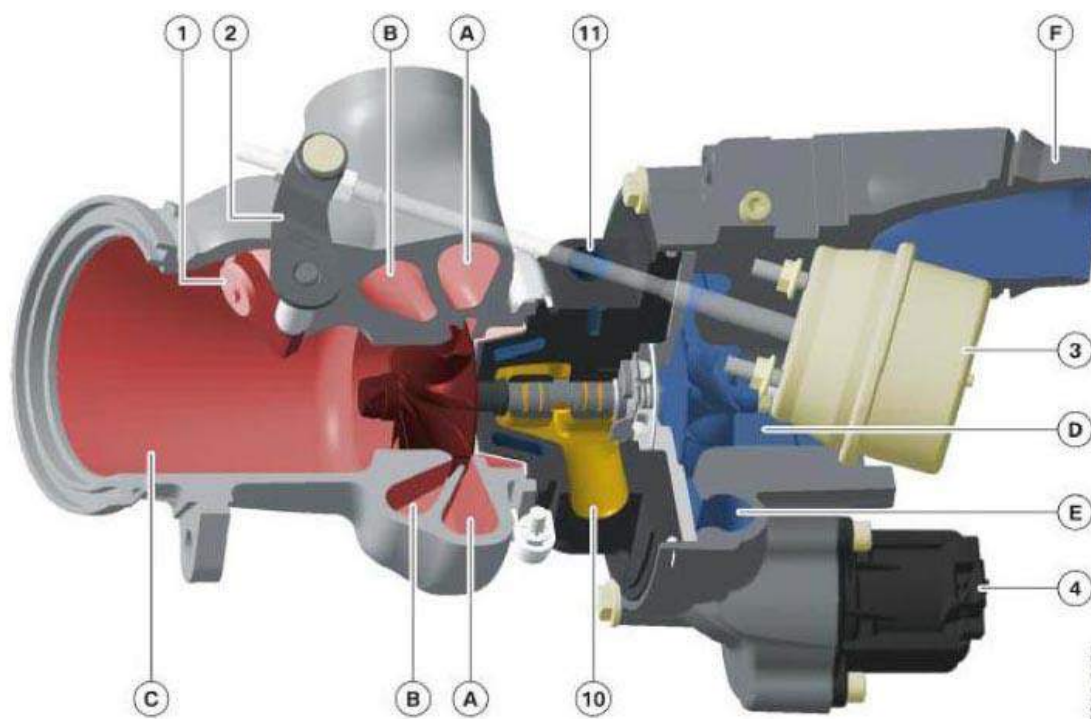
Identifying Twin Scroll Turbocharger Components Front View
